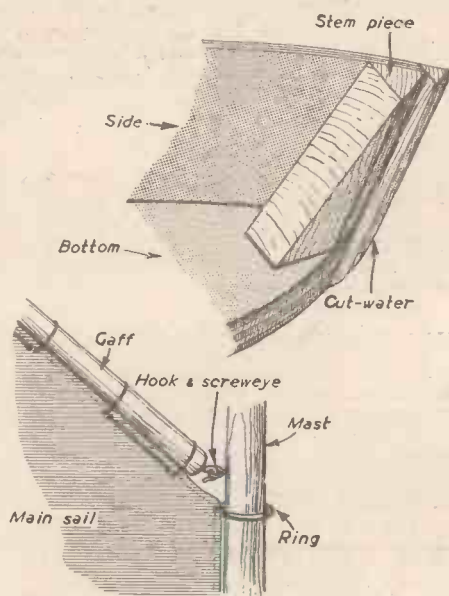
Positioning the stem piece and cutwater, and attaching the gaff to the mast.
